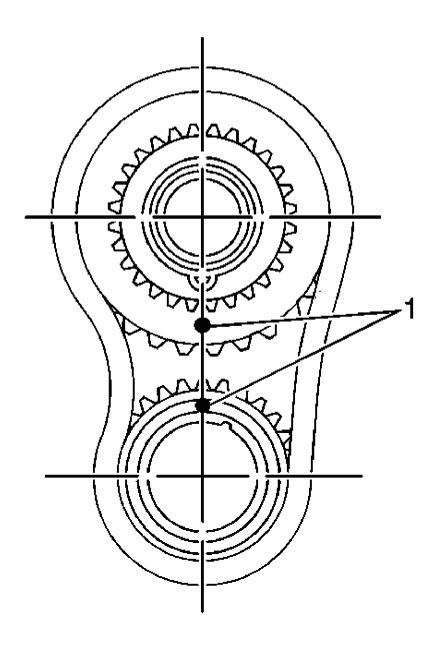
Aligning Timing Marks Of Camshaft Intermediate & Crankshaft Sprockets
